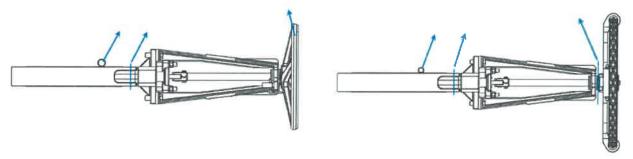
, Knife Gate Valve with Handwheel or Chainwheel Actuator, Horizontal Lifting
